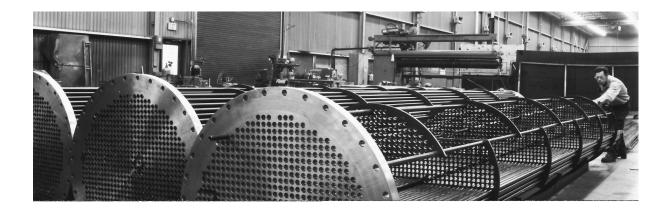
Shell and tube heat exchanger under construction (courtesy of Guston County Dyeing Machine Co.)
